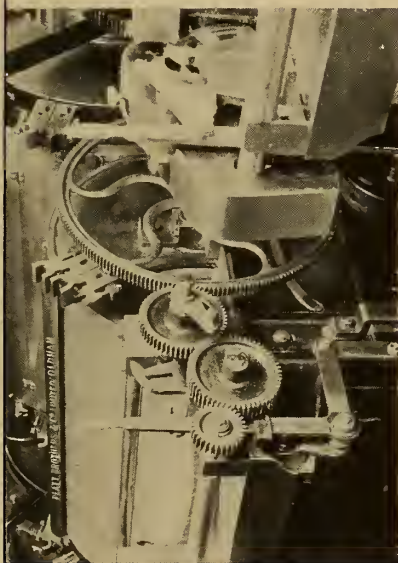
DOFFER AND CARRIER WHEELS ON CARDING ENGINE
